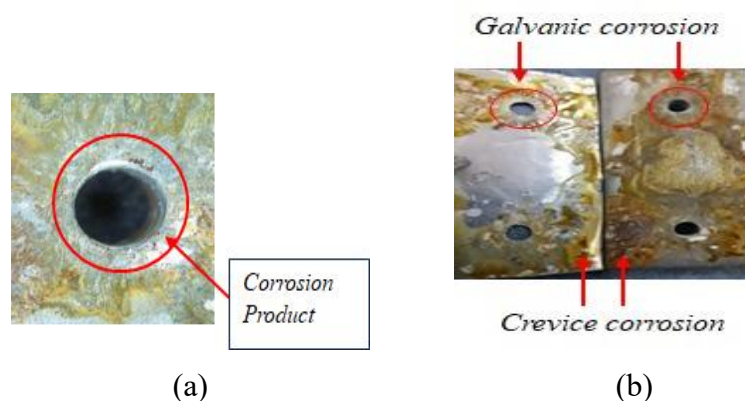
Galvanic corrosion on a) riveted joint, b) interface of riveted joint
